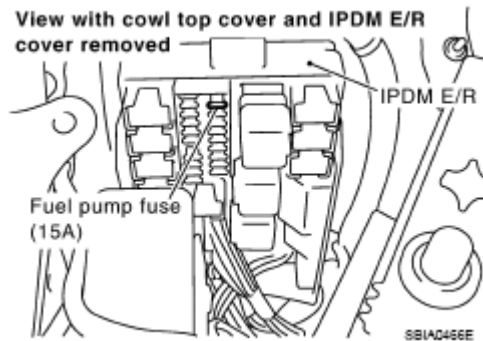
Identifying Fuel Pump Fuse To Avoid Fuel Injection
